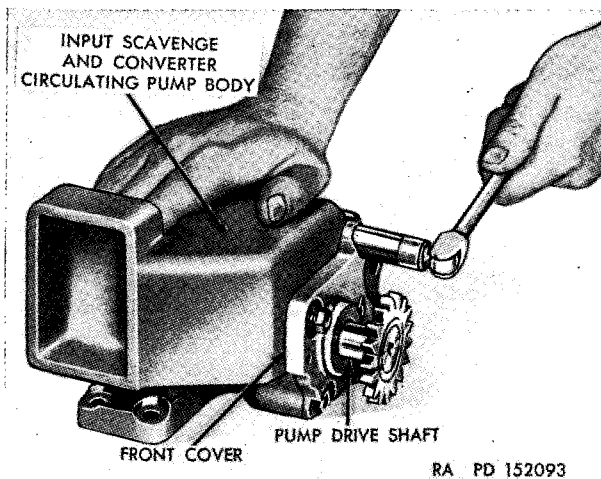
Removing or installing front cover bolts of input scavenge and converter circulating pump.
